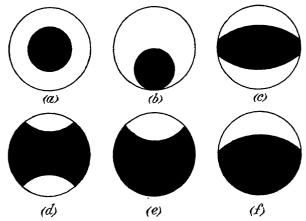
Illustrating Types of Fatigue Fracture
